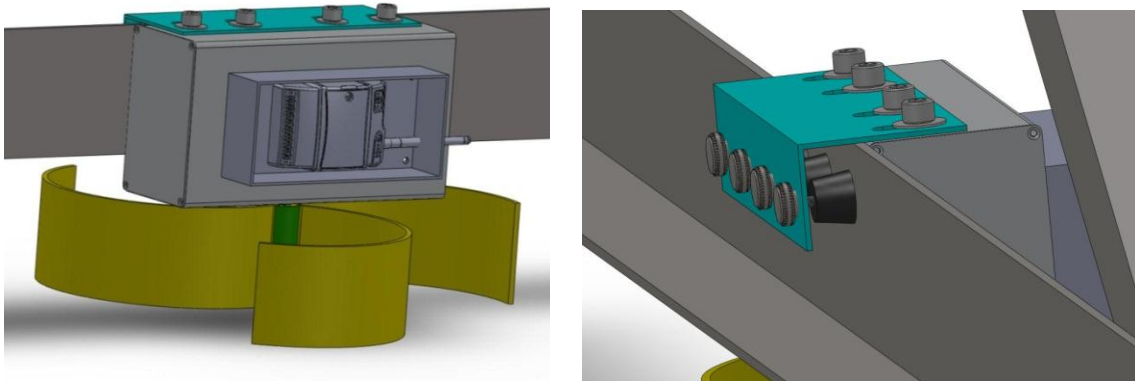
Close-up of the alpha prototype and the Wireless Sensor Node (left) and the attachment assembly of the alpha prototype.
